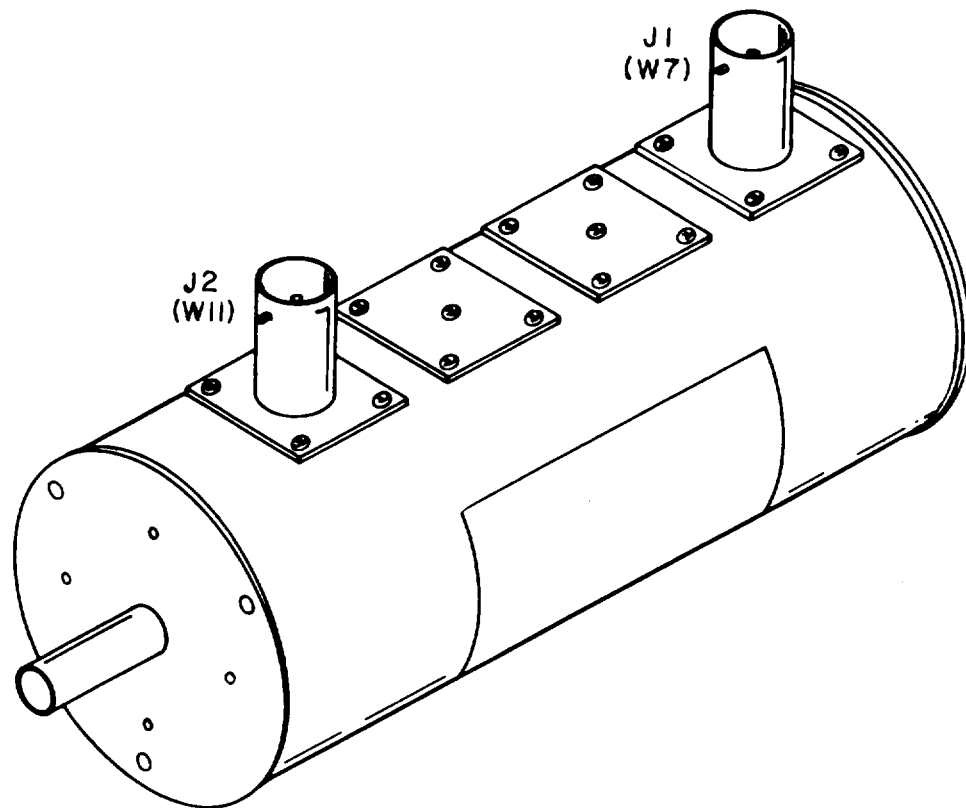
RF Circuit Breaker Assembly A12—cover removed.
